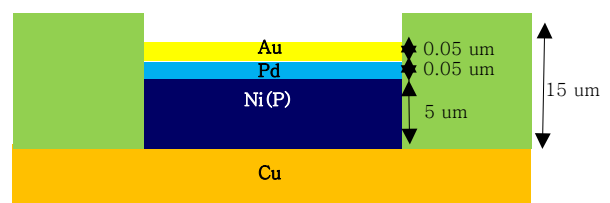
Schematic illustration of ENEPIG surface finish on Cu pad of the FR-4 PCB
